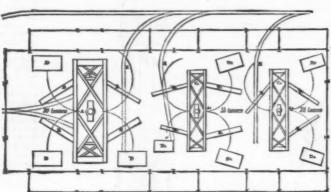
GENERAL PLAN OF THE FORGING MILL
